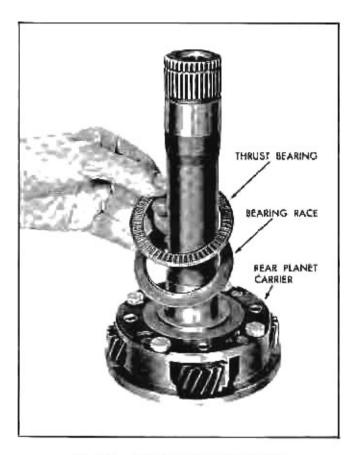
Installing Thrust Bearing on Rear Planet Carrier
